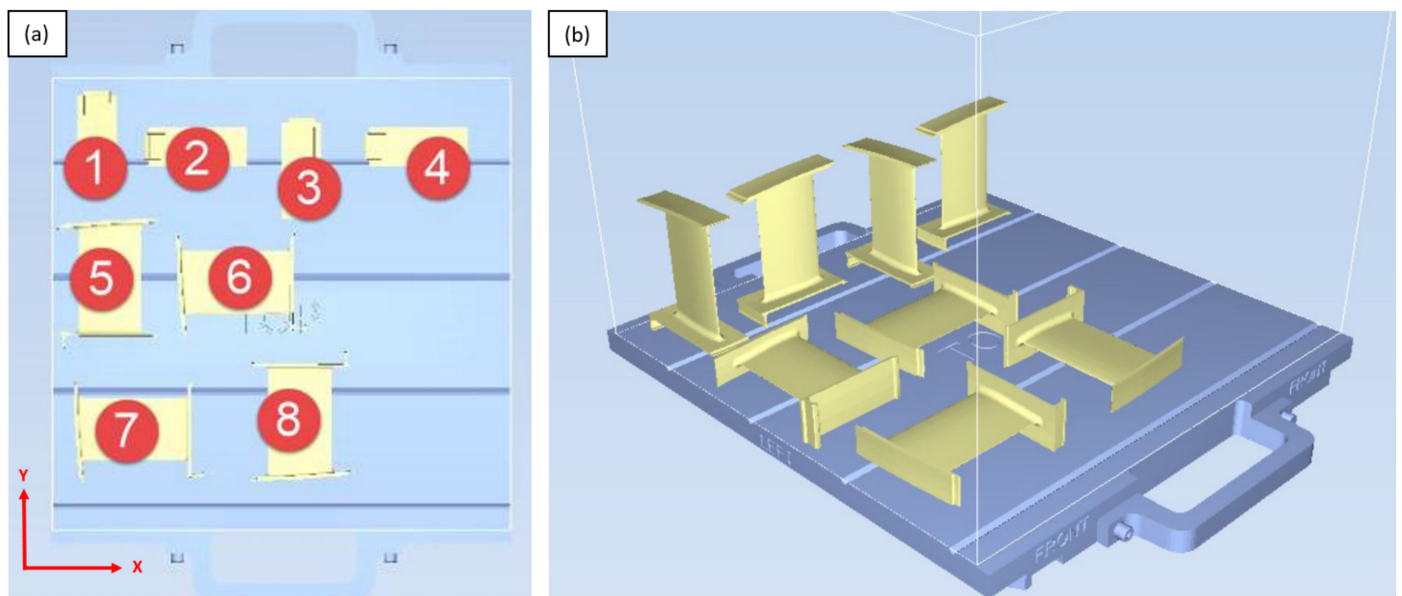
(a) Build layout looking from above; (b) build layout in isometric view.
